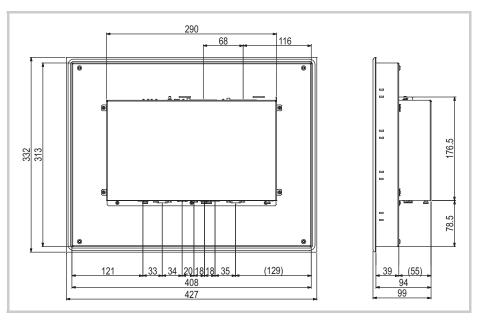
Mechanical dimensions of the 15" devices with standard or stainless steel front in mm
